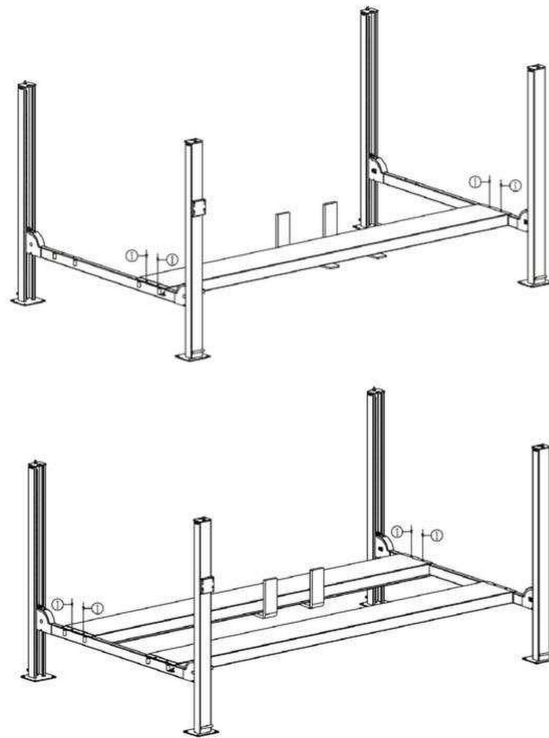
Fitting the lifting platform to the crossbeam ((1) M12×25 hex socket flat head screw)
